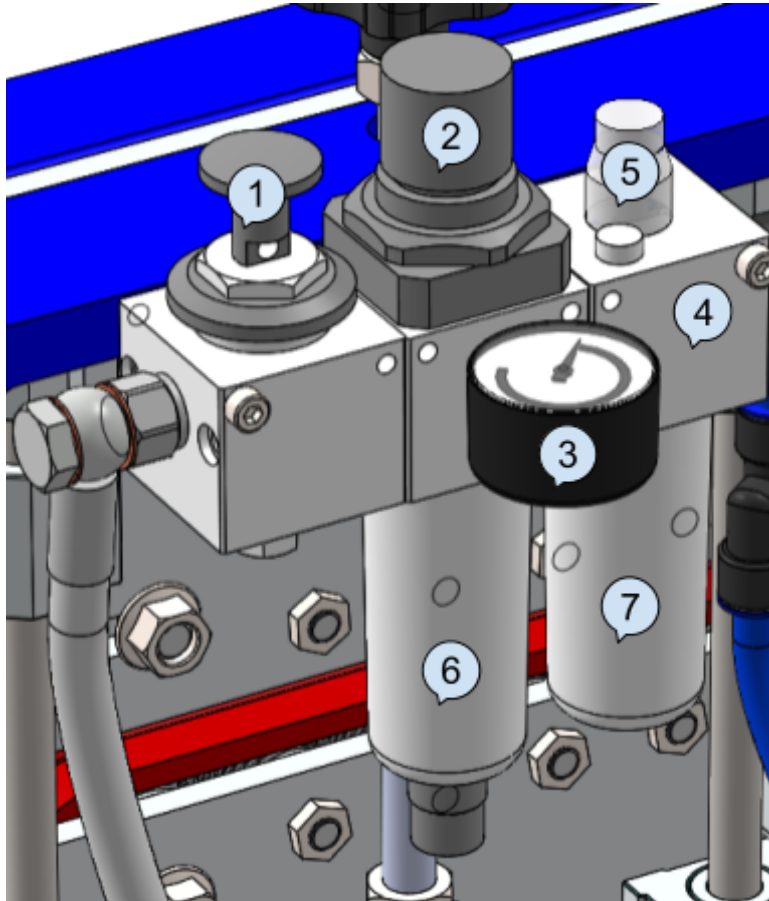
Air preparation unit consisting of a switch, pressure regulator with pressure gauge and water separator, and a grease gun for air motors.
